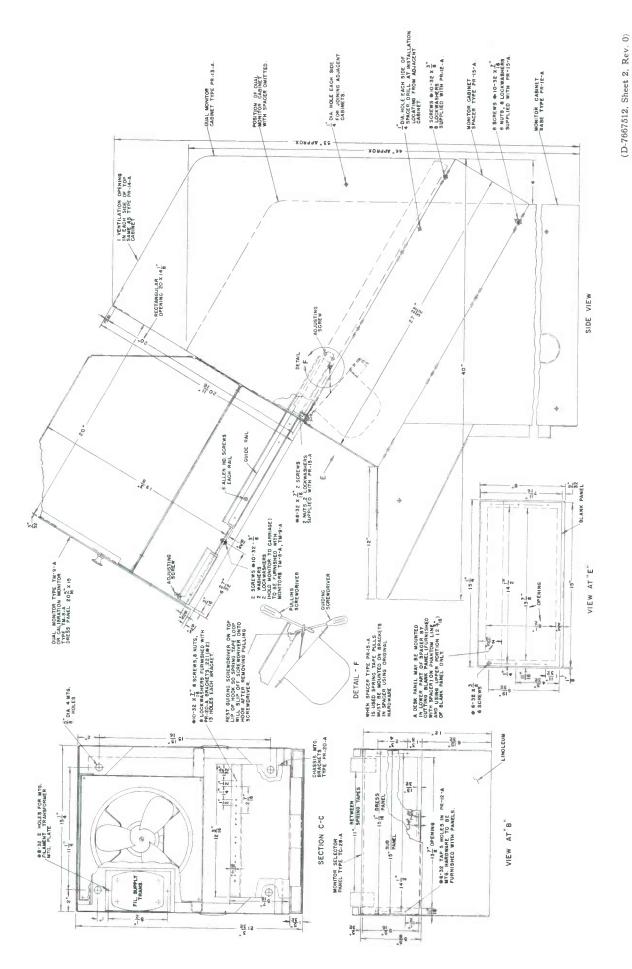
B Cabinets, Types PR-12-A, PR-13-A, PR-14-A, PR-15-A, Outline and Clearances Drawing
